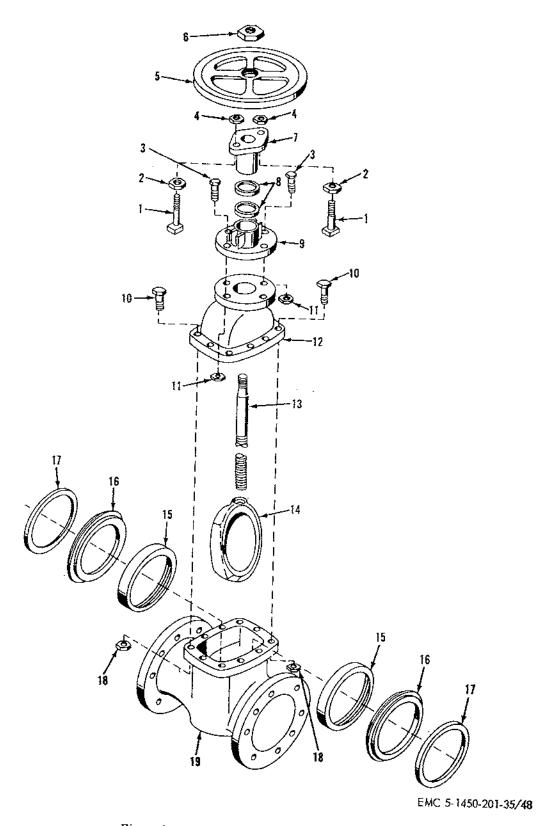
3 or 4-inch gate valve, exploded view.
